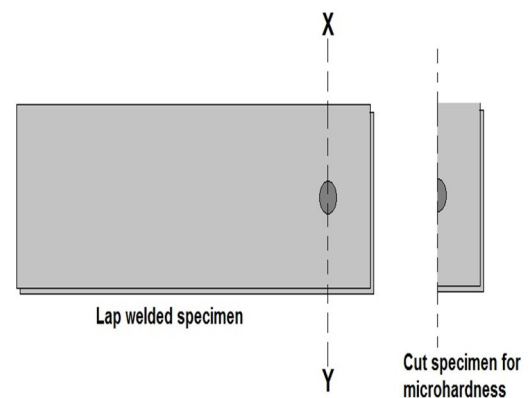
Microhardness welded specimen and its cutting plane XY
